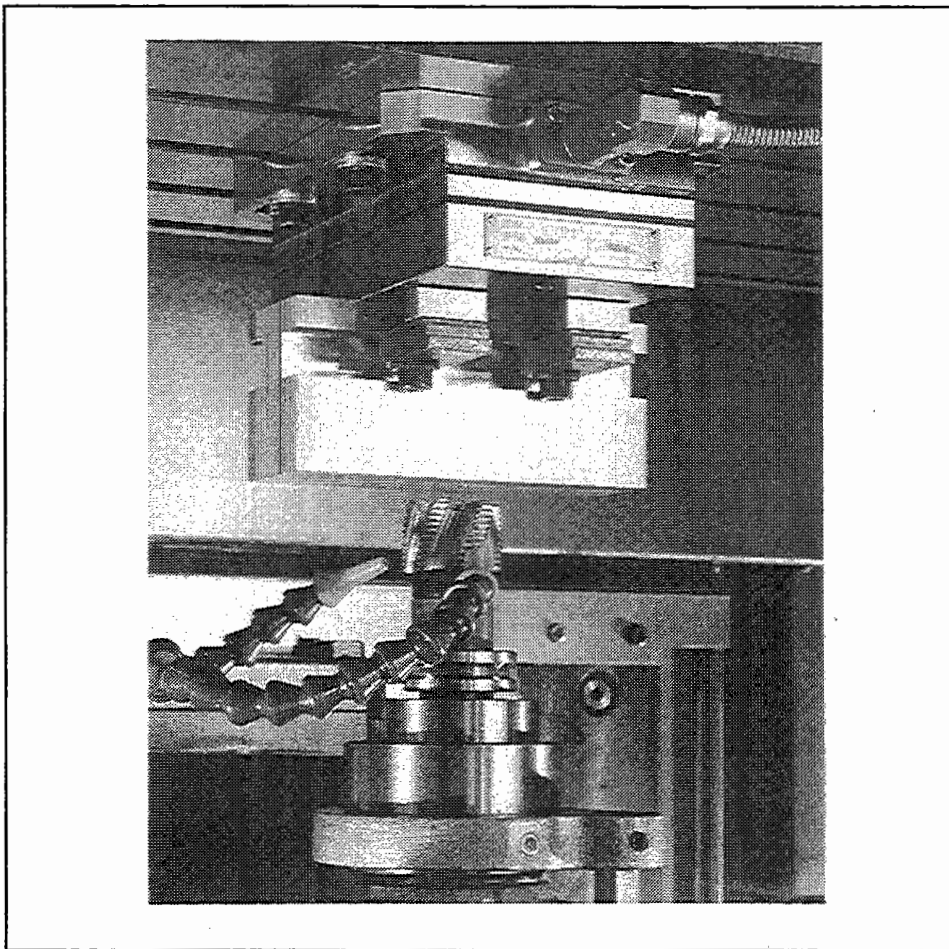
/2: Monitoring feed force and torques in a modern machine tool (Photo: Kistler Instrumente GmbH)
